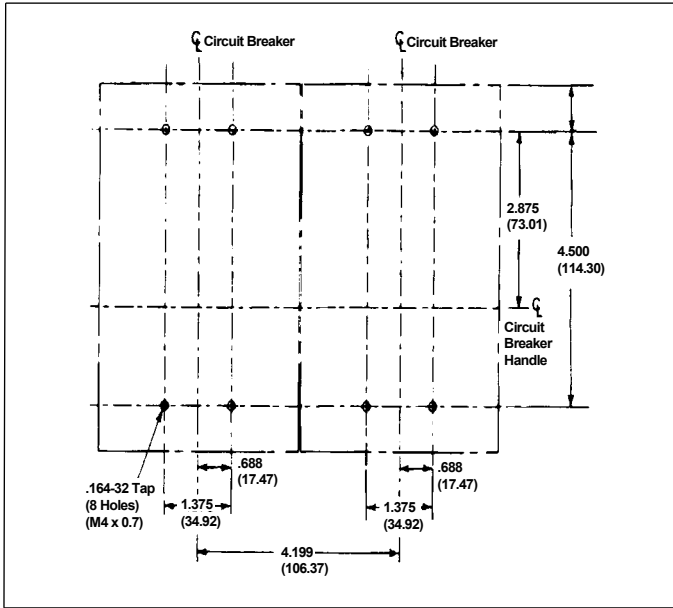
F-Frame Circuit Breaker Mounting Bolt Drilling Plan.
